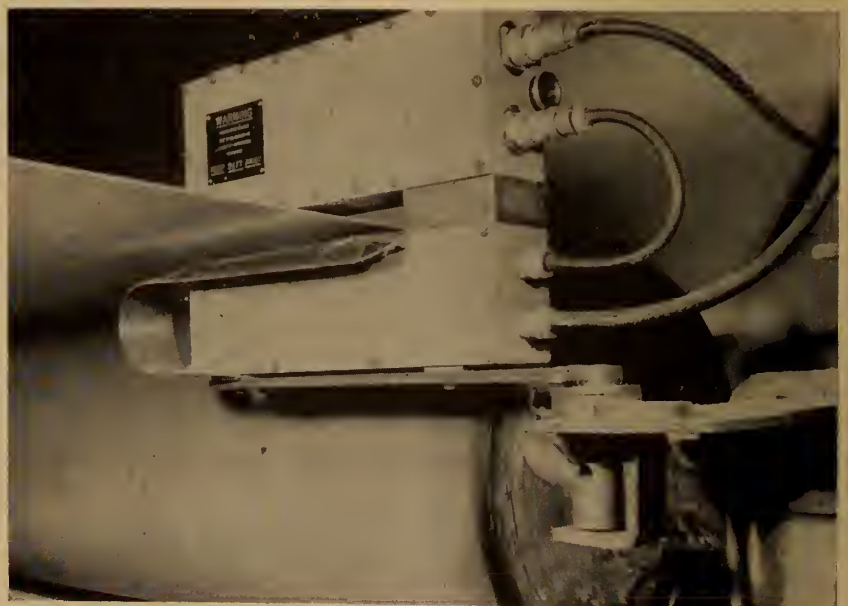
Beta-ray basis weight head used to measure sheet thickness on a board machine.
